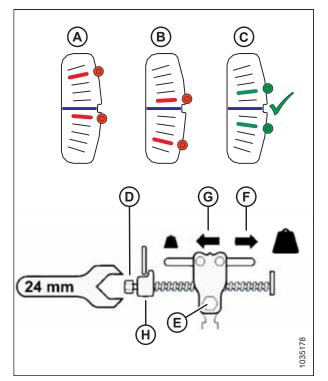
Left Wing Balance Adjustment Checker Plate
